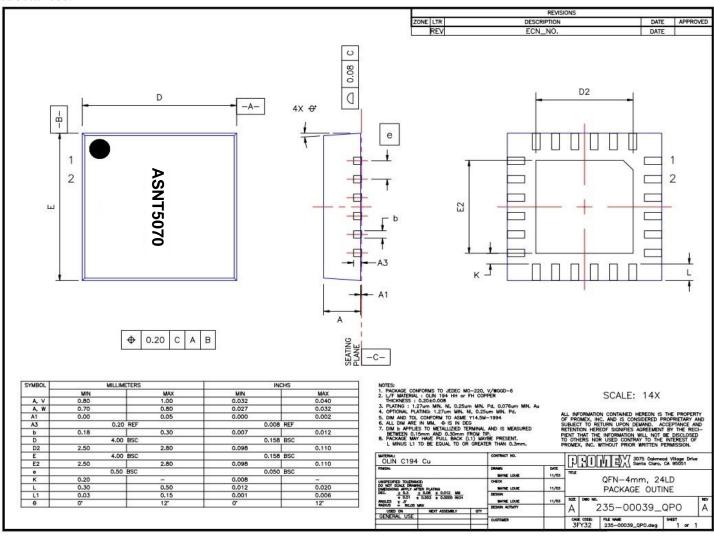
QFN 24-Pin Package Drawing (All Dimensions in mm)
